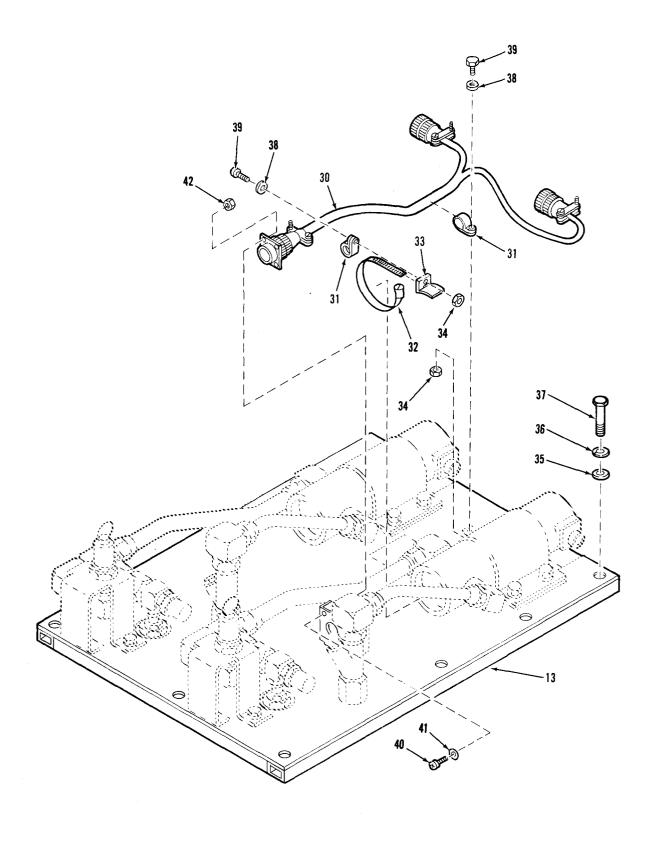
Fog Oil Pump Assembly (Sheet 2 of 2)
